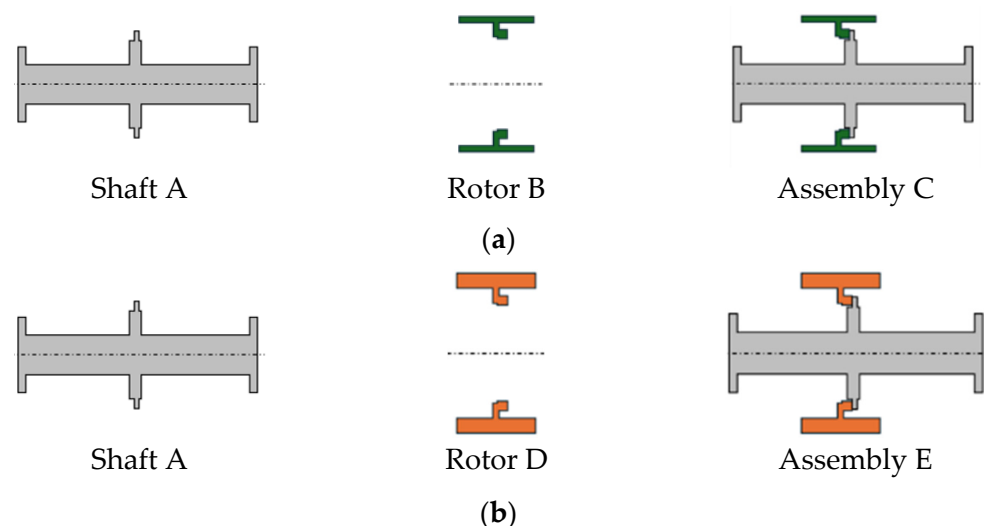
Substructure geometry and assembly structure. (a) Shaft A, rotor B (rotor (1)), assembly C (shaft + rotor (1)). (b) Shaft A, rotor D (rotor (2)), assembly E (shaft + rotor (2)). Each rotor has the same coupling geometry but different mass properties: rotor (1) $\approx$ 3.1 ton and rotor (2) $\approx$ 3.5 ton.
